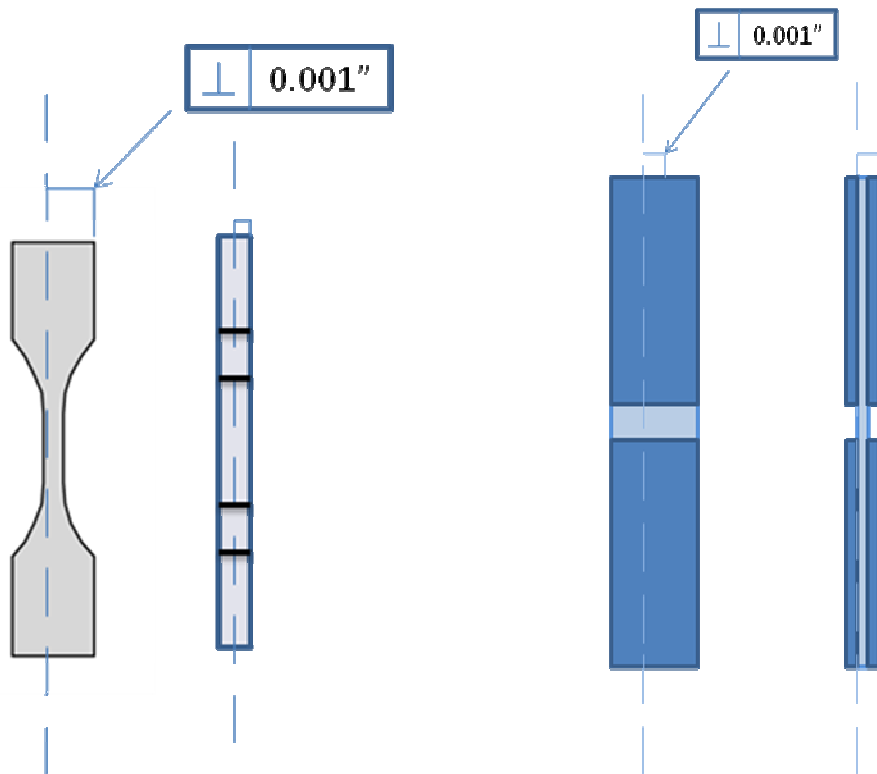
Perpendicularity Tolerance for Compressive Specimen Ends, “dog-bone” (left), “tabbed” (right)
